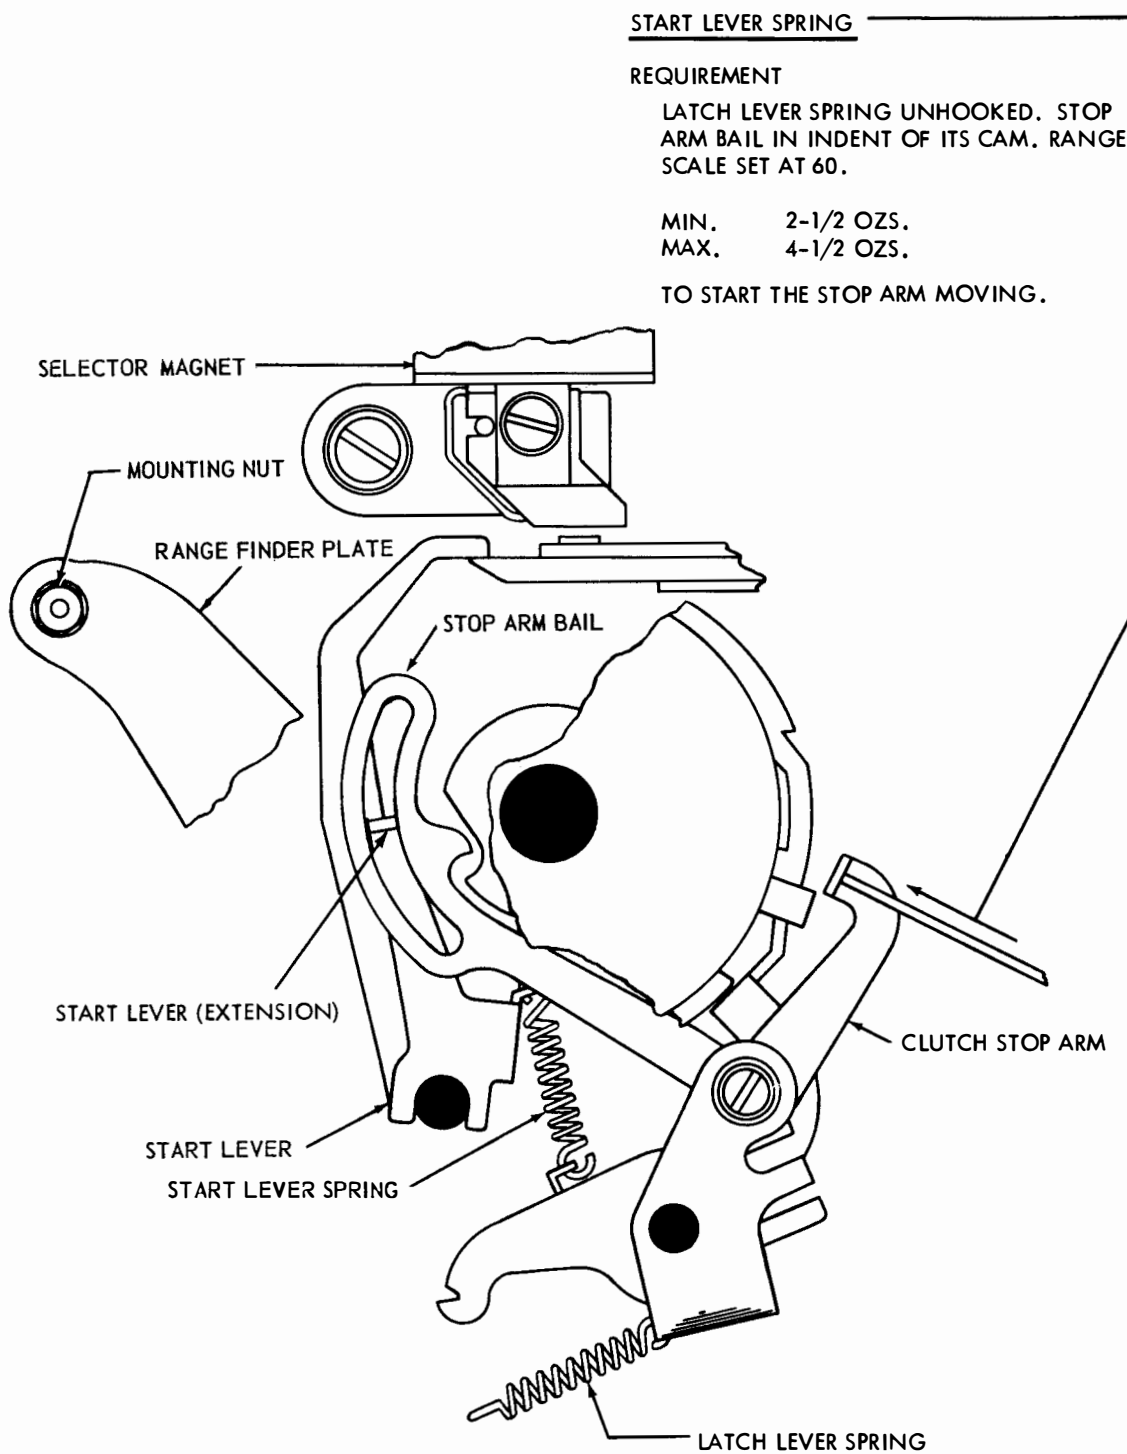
Automatic Typewriter, Selector Clutch Mechanism, Right Side View
